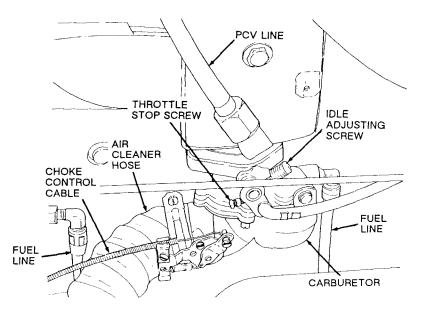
Carburetor assembly, installed view (model MHE-220).
